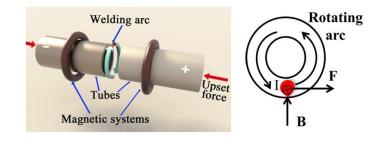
Schematic and force figure of rotating arc welding [22]
